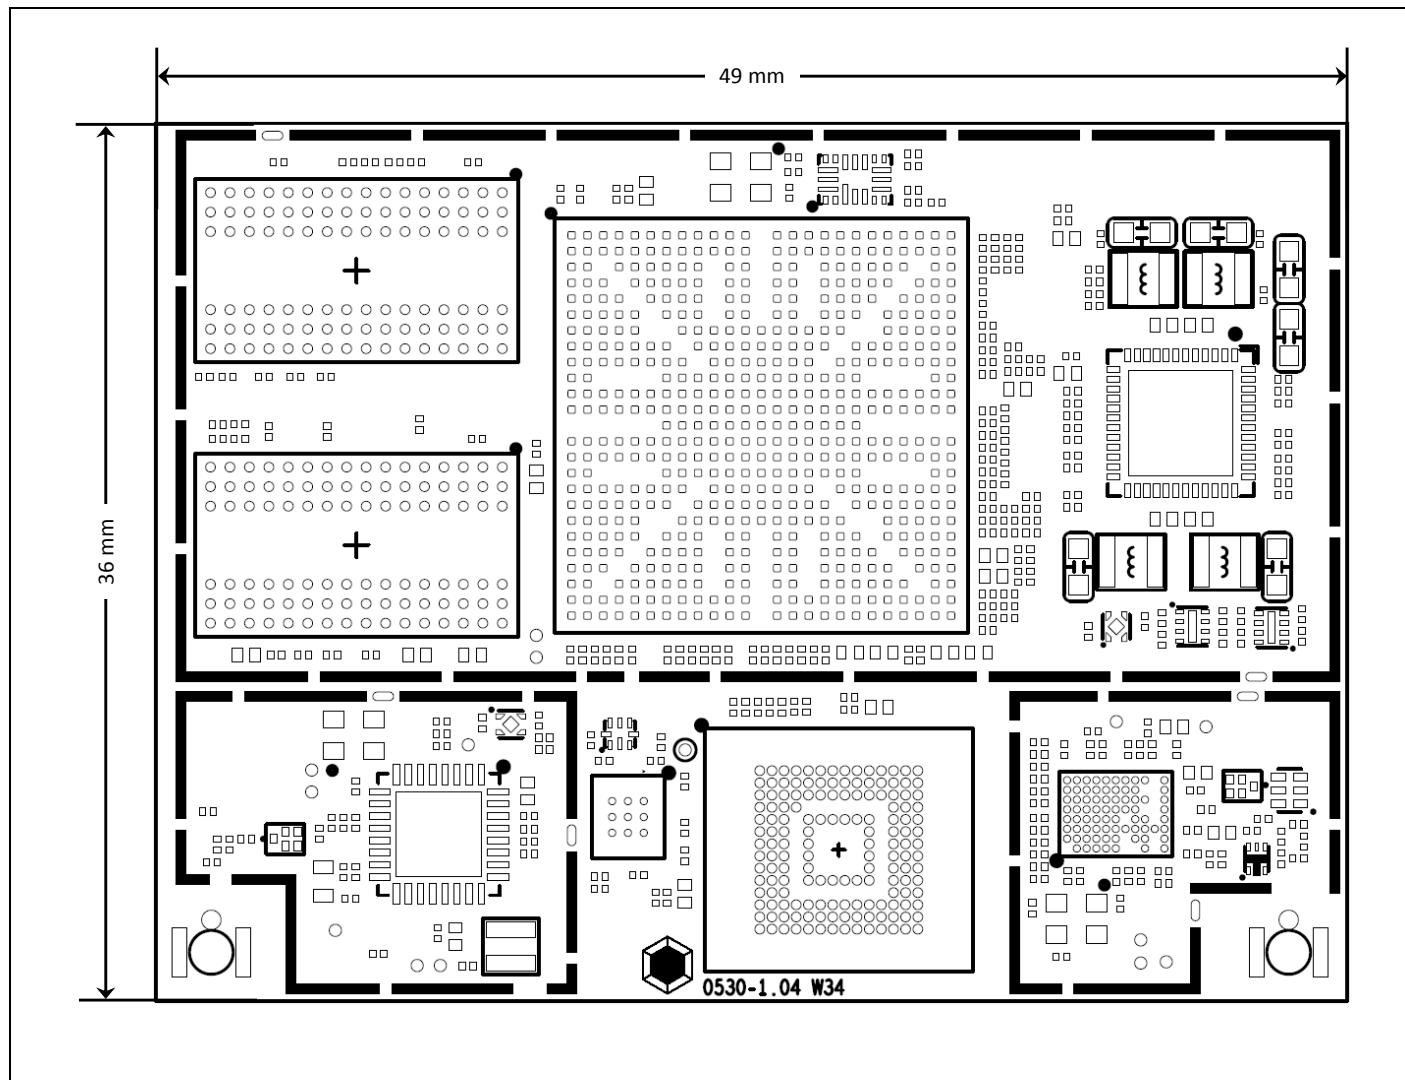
ARTIK 530 Module Top View Mechanical Dimensions and Part Location
